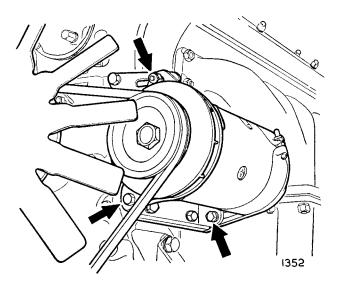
To adjust the fan belt tension slacken the three dynamo mounting bolts and move the dynamo into the desired position.
